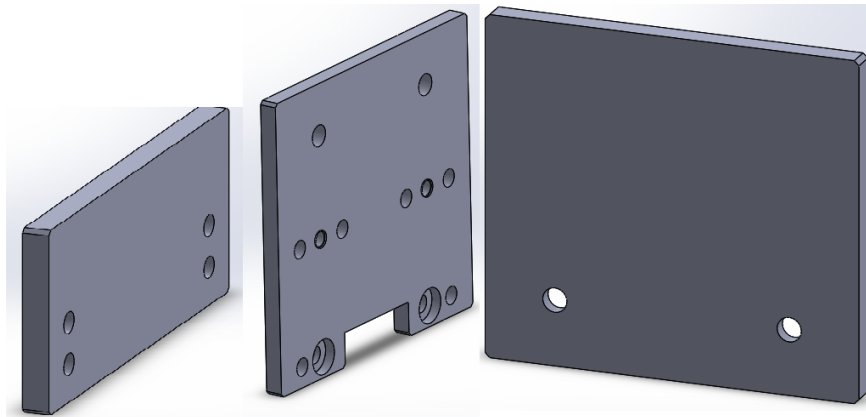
Respectively, support's wall, seat's wall and back wall
